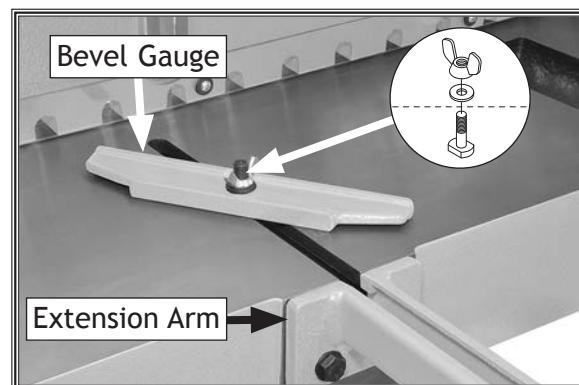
Bevel gauge installed to support angled front workpiece edge.
